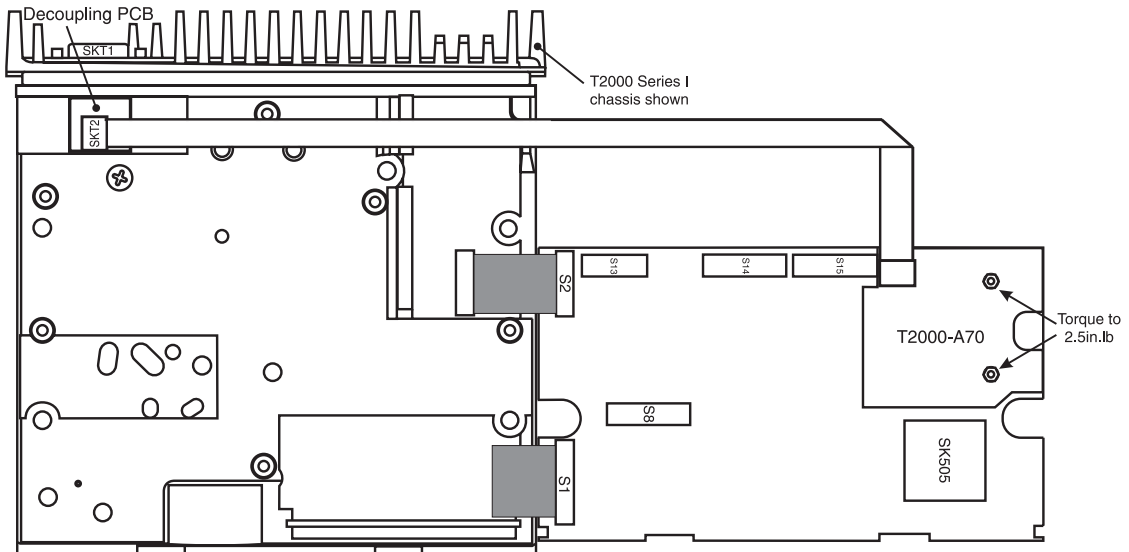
T2000-A70 Data Modem PCB Mounting
